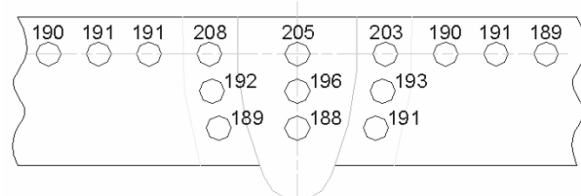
Hardness distribution HV 10 on the section of welding cold forming shape 100x100x4 mm of S355J2H steel in the welding zone
